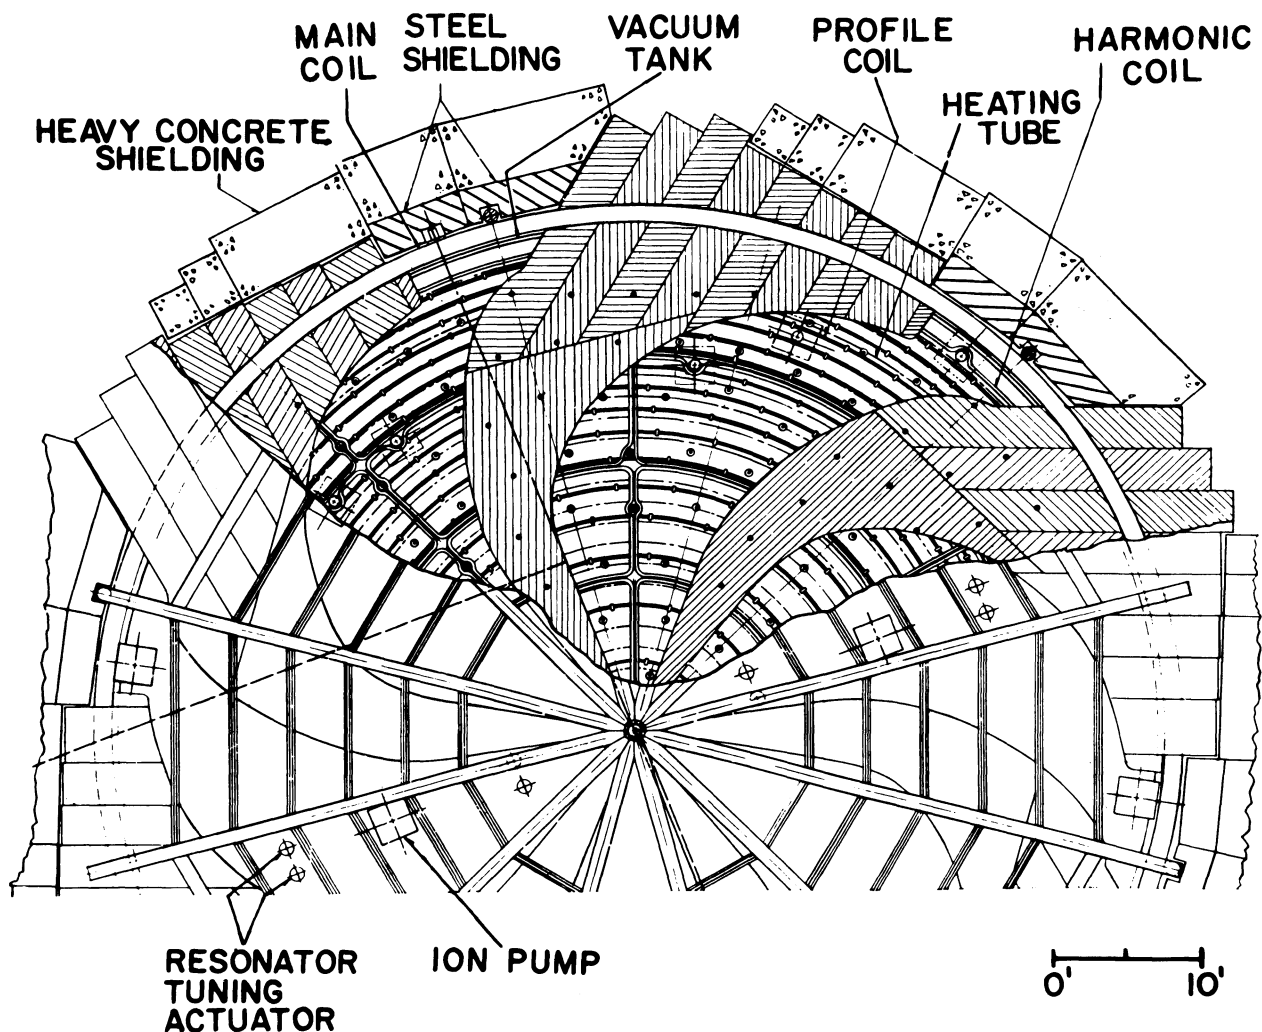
Plan view, showing spiral shape, tank support frame, main coil, and other indicated details of the design.
